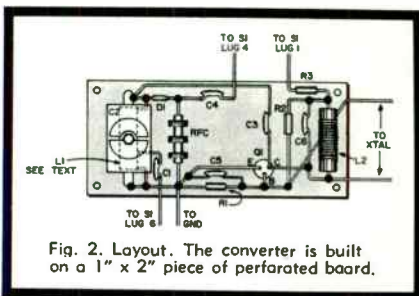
Layout. The converter is built on a 1" x 2" piece of perforated board.
